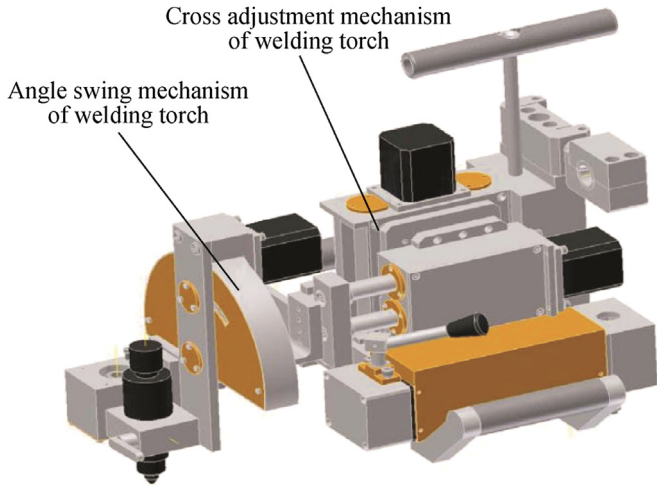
3D Design model of a pipe welding carrier.
